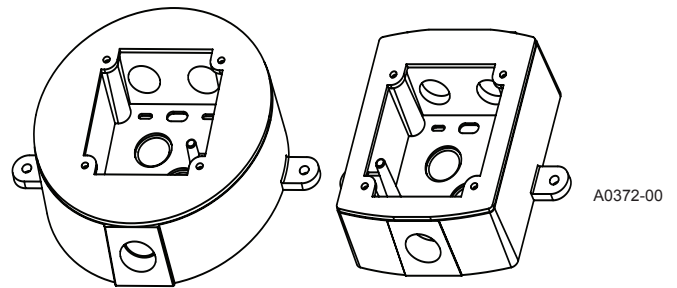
Wall and Ceiling Mount Weatherproof backbox:
